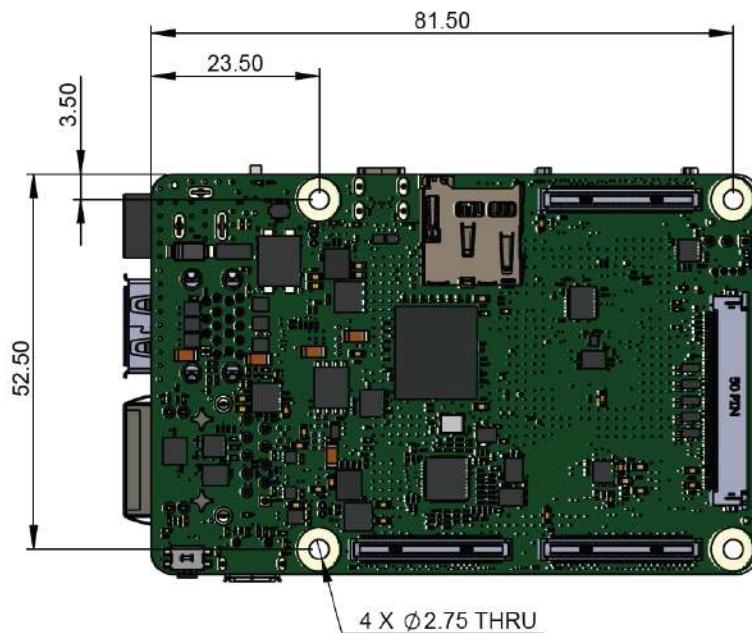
Mechanical Dimensions of STM32MP135 SBC Bottom View
